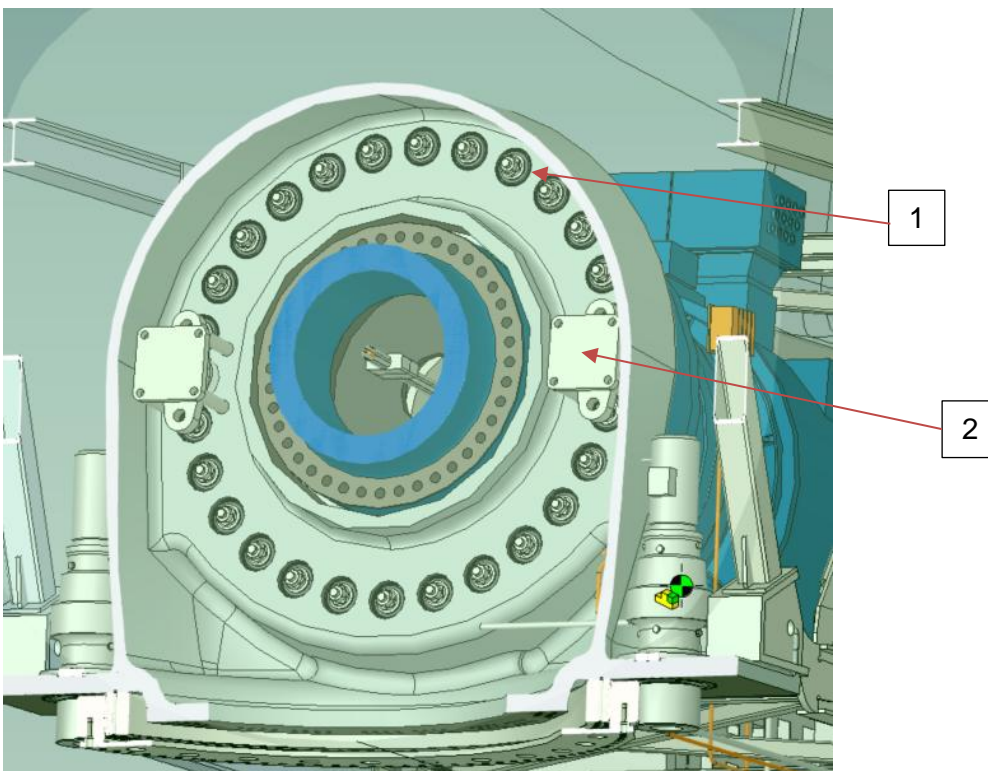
arrangement example of elastomer elements, elastomer bushing (1), elastomer hydraulic element (2) Source bewind
